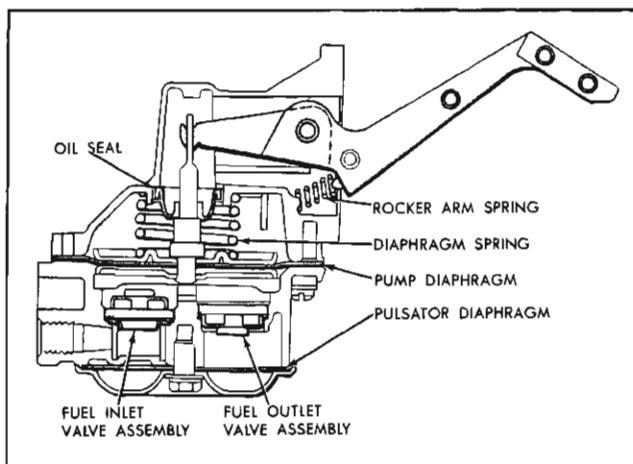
B-129 Schematic View of Fuel Pump (V-8)
